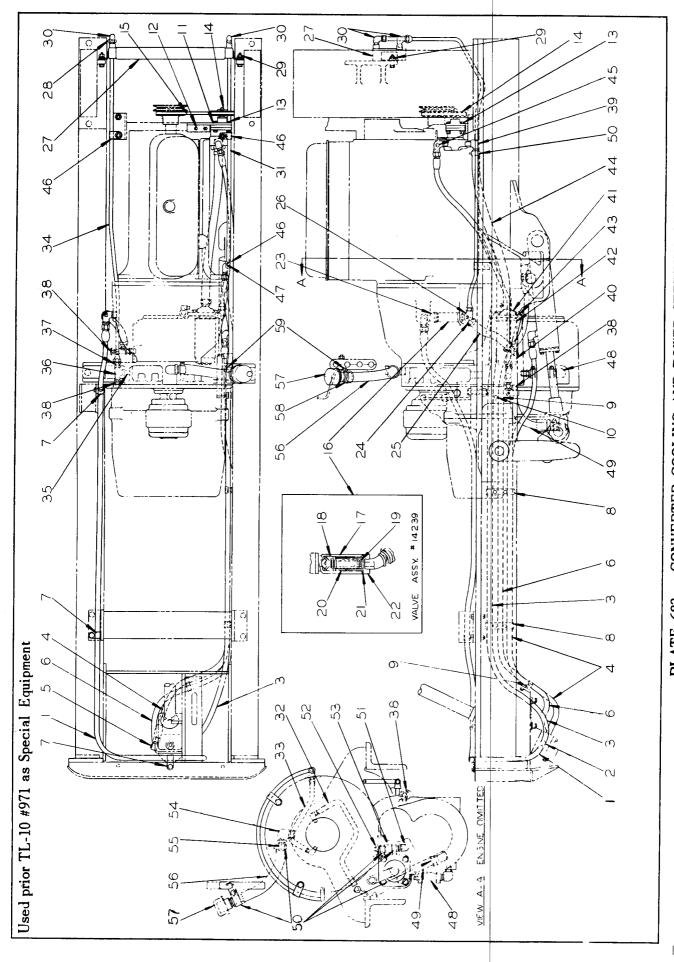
CONVERTER COOLING AND POWER STEERING LINES
